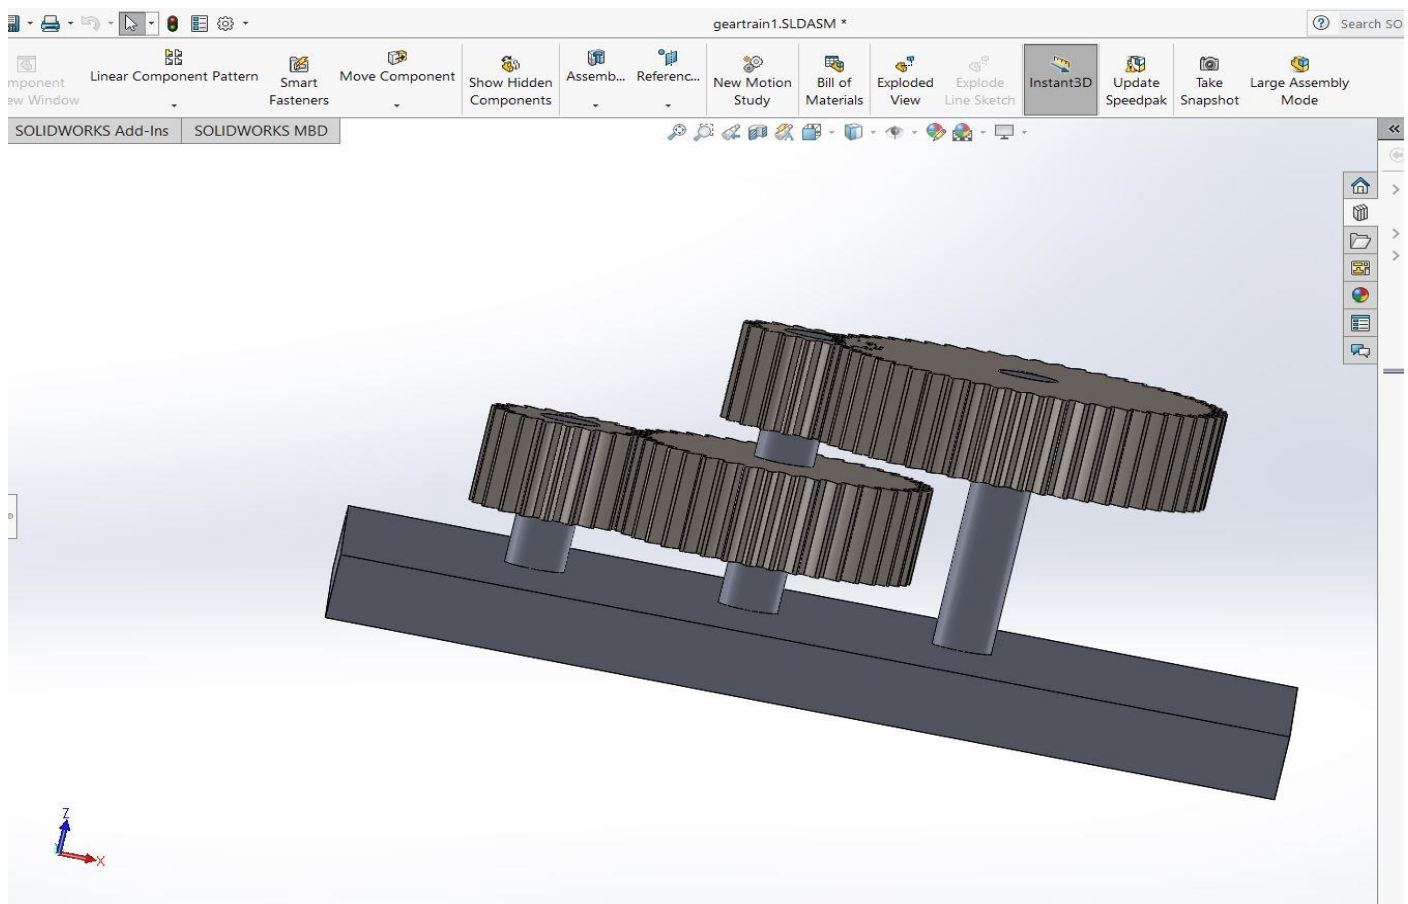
FIG:SOLIDWORKS ASSEMBLY OF 6:1 GEAR REDUCTION OF COMPOUND GEAR TRAIN.
